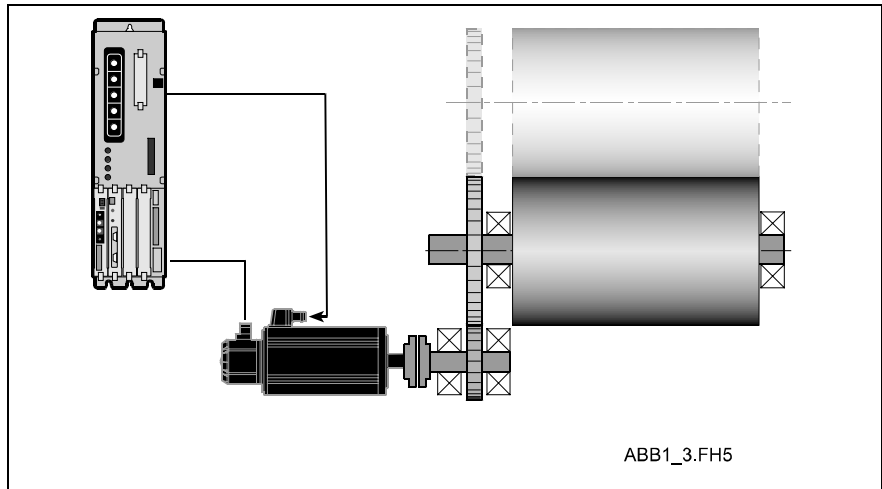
Axis drive with gear and indirect measuring system, e.g., a press roller
